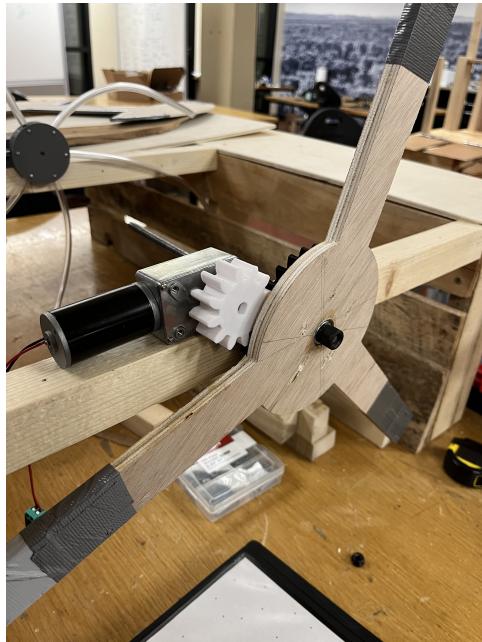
Prototype of the first blade with the large gear screwed on and the dead axle system constructed
